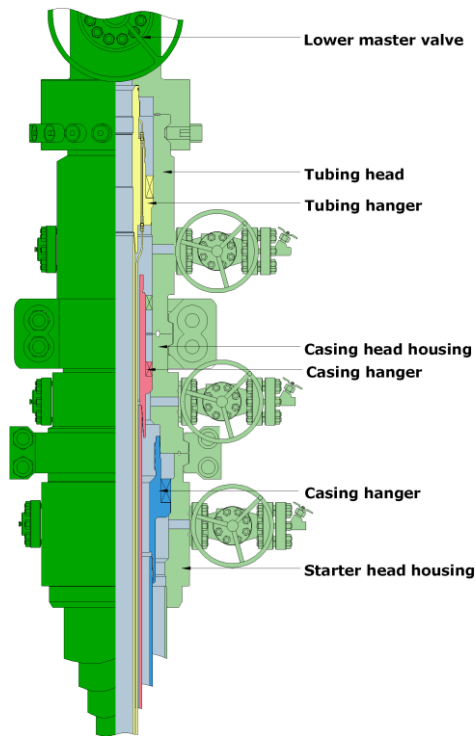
Typical split drill through type wellhead assembly nomenclature (Statoil, TR3540)
